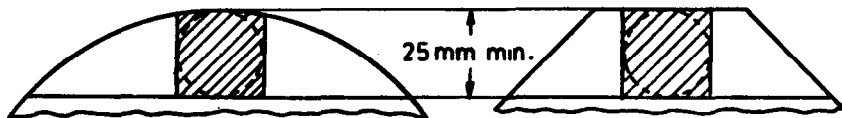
POSITION OF BEND TEST PIECE IN ROUND OR POLYGONAL SECTIONS
